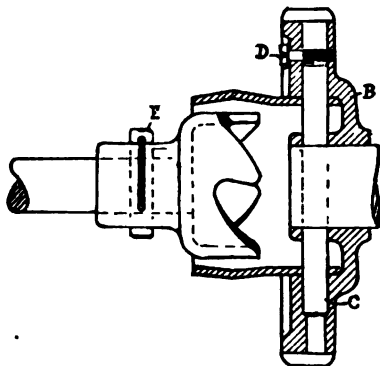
Method of mounting driving sprocket and fan pulley on crankshaft
